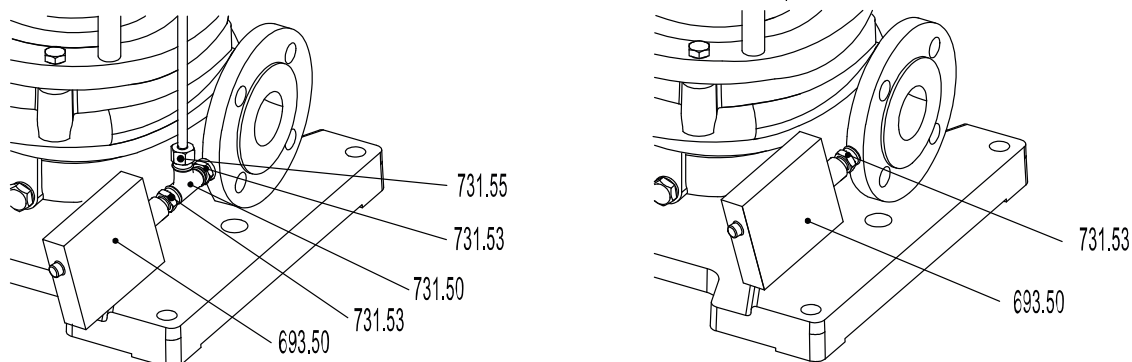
General assembly drawing of venting system with auxiliary pump ILNS/ILNCS
